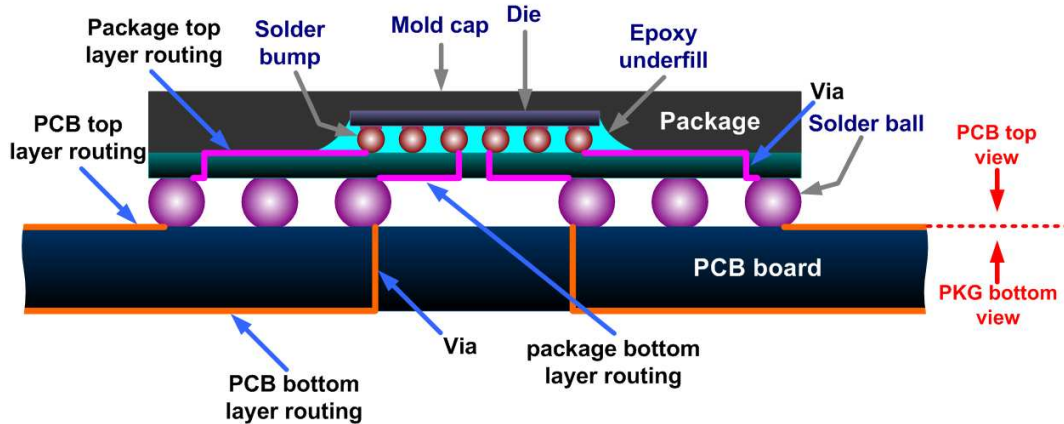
Simplified cross-section of a flip-chip package mounted on PCB board.
